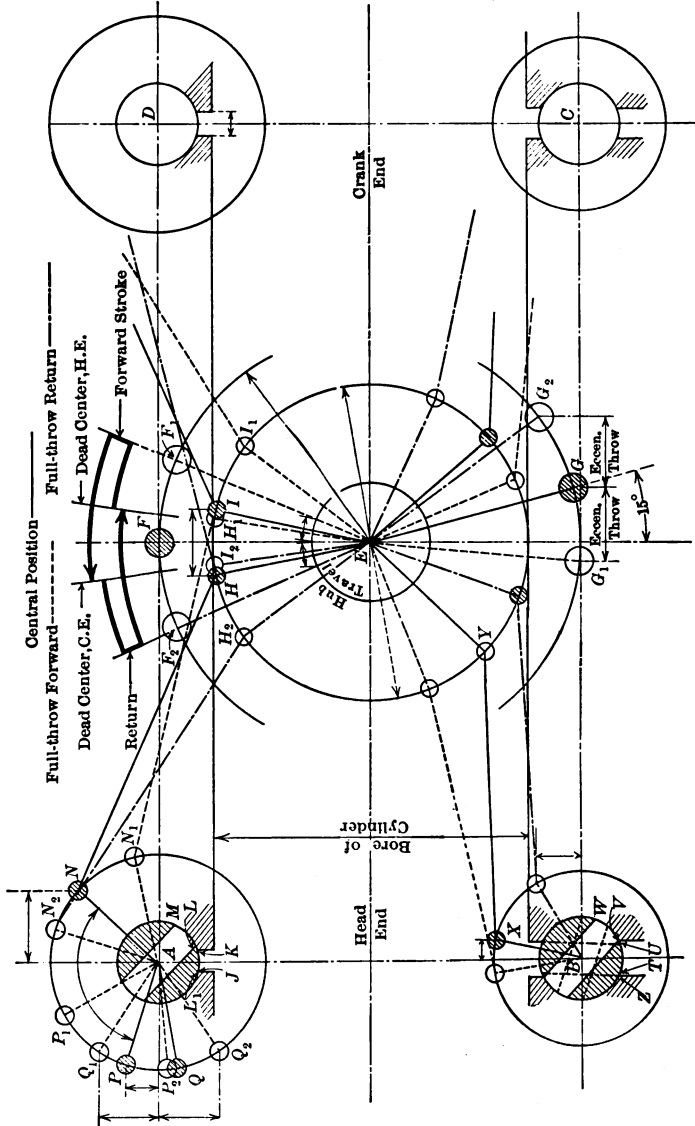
LAYOUT FOR CORLISS VALVE GEAR
